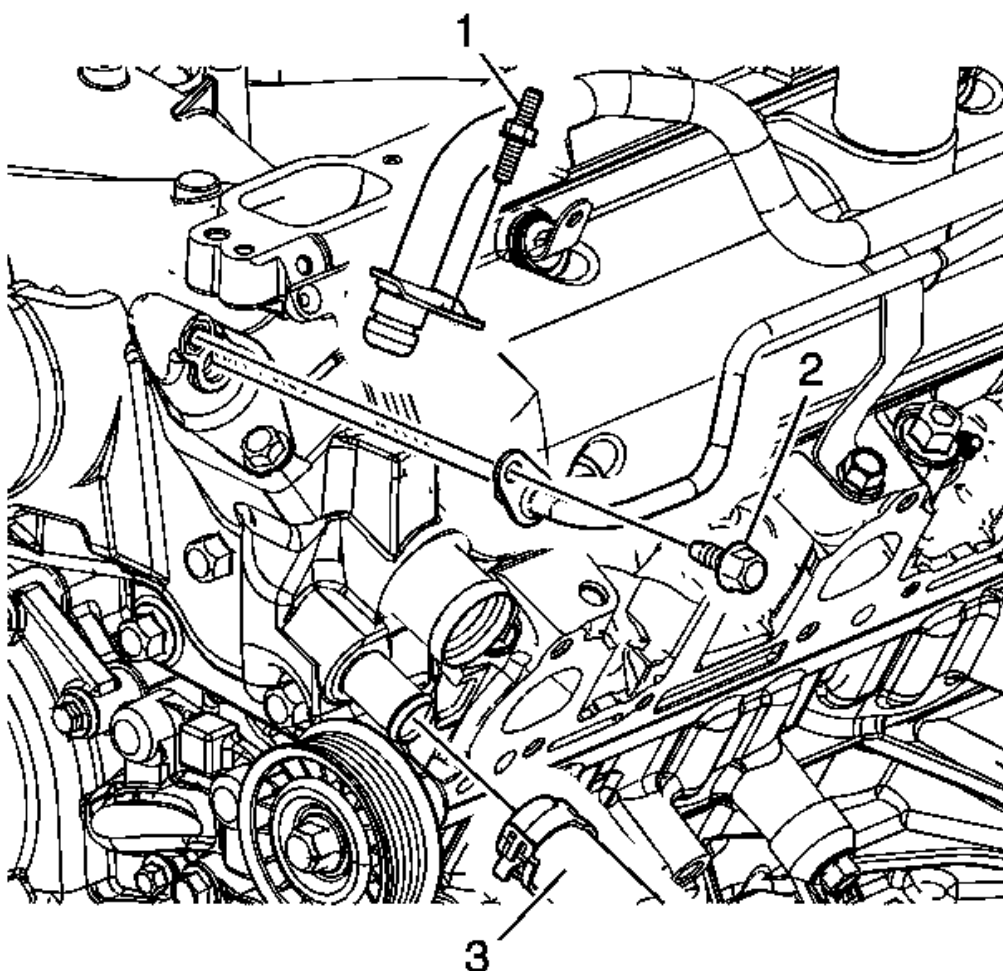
Identifying Thermal Bypass Hose & Clamp
